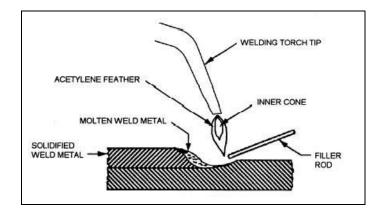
Welding Process. (Source :< <u>http://www.corrosionist.com/oxyfuel_gas_welding.htm/</u>>)
